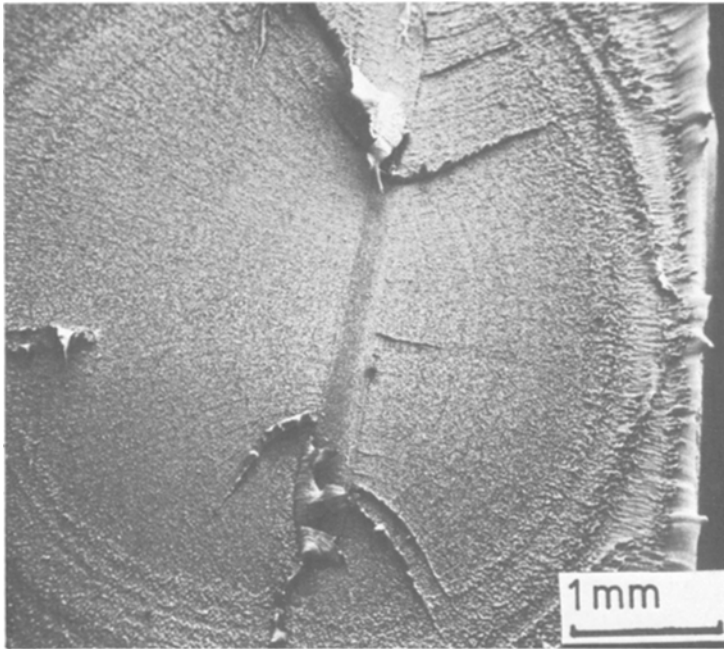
Fibrous inclusion which initiated the fracture of a fatigue tested PE1 pipe. Note that when fracture is initiated by such an inclusion the aspect ratio of the fracture surface does not conform to that predicted by Fig. 8.
